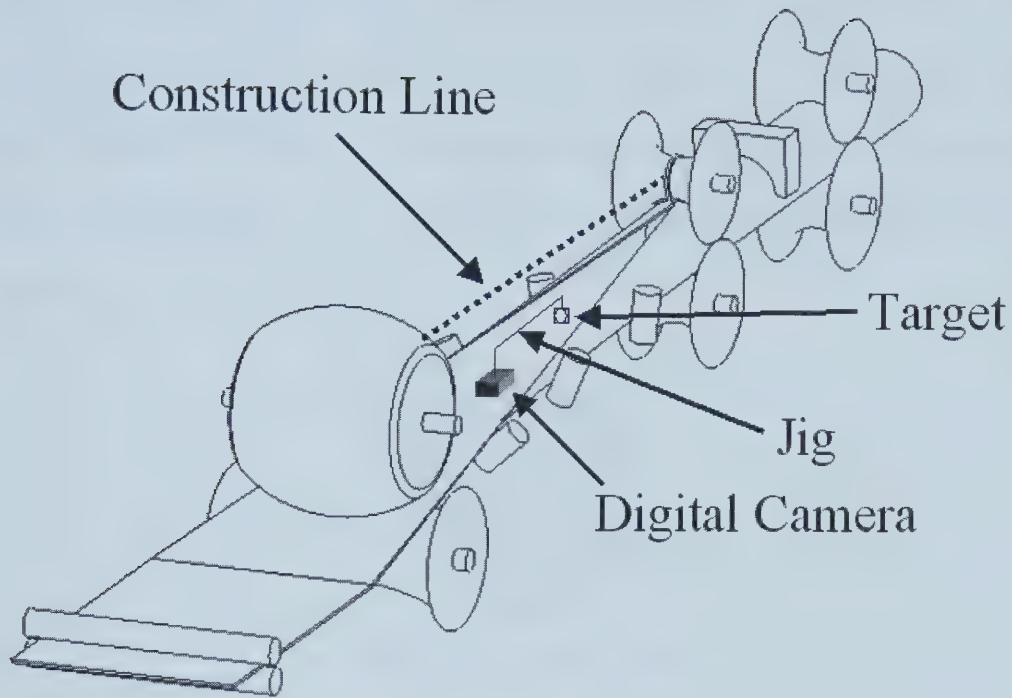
Illustration of camera jig positioned in partially formed pipe.
